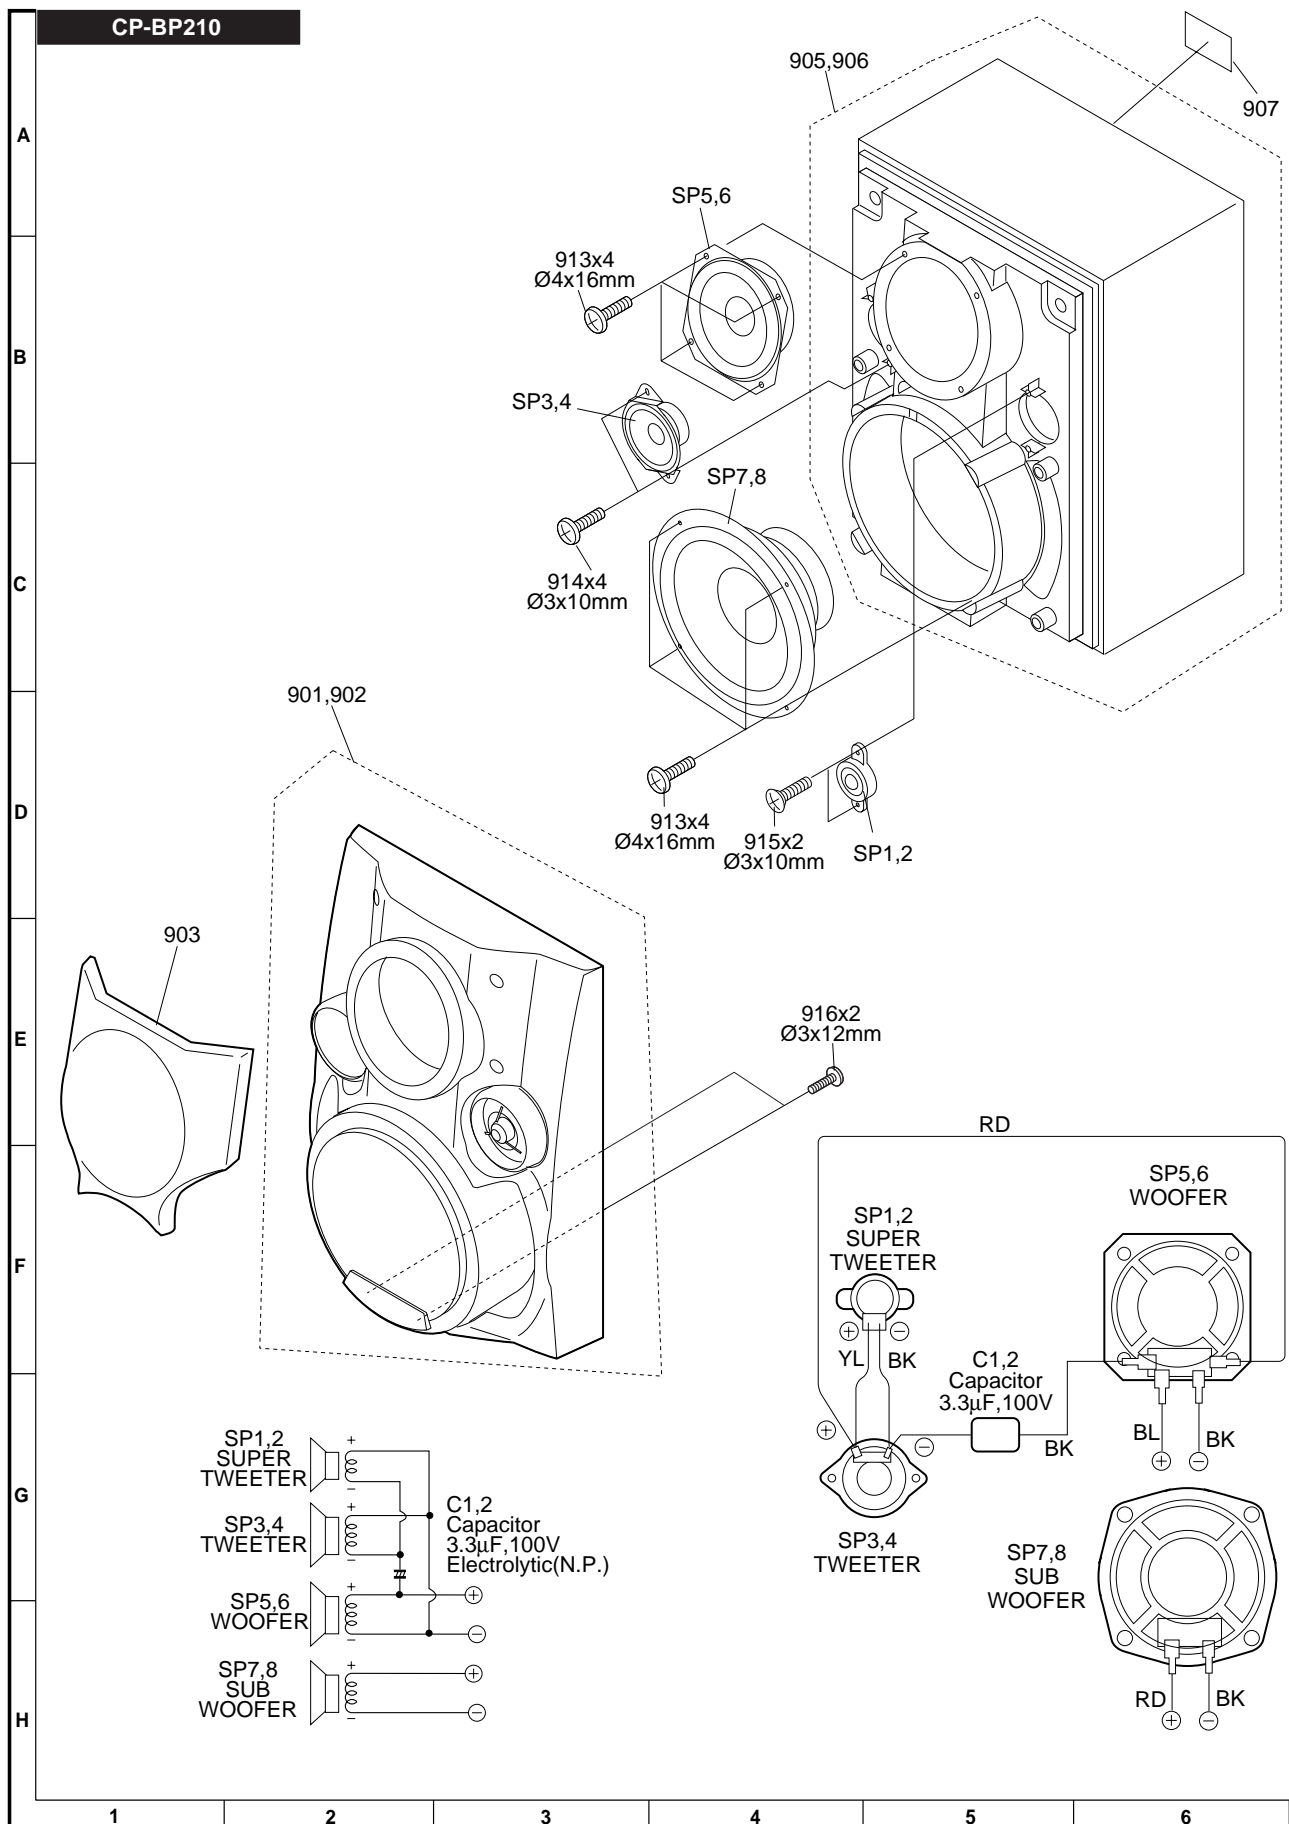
SPEAKER EXPLODED VIEW (2/3)
